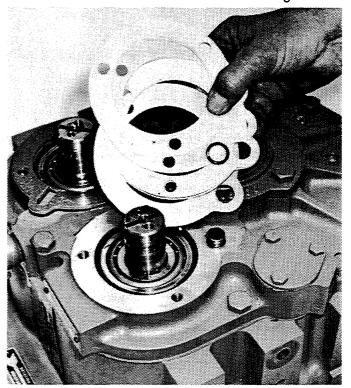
Pump Mount Shims and O-Ring Seal.
